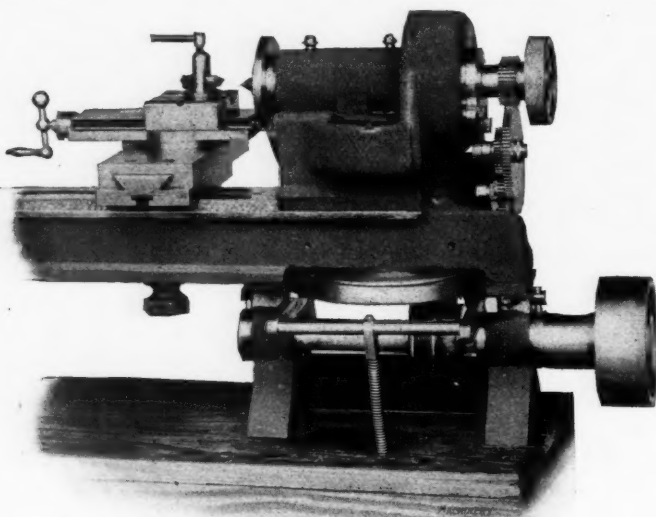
Rear View of Headstock and Friction Drive, showing Foot-pedal Release
